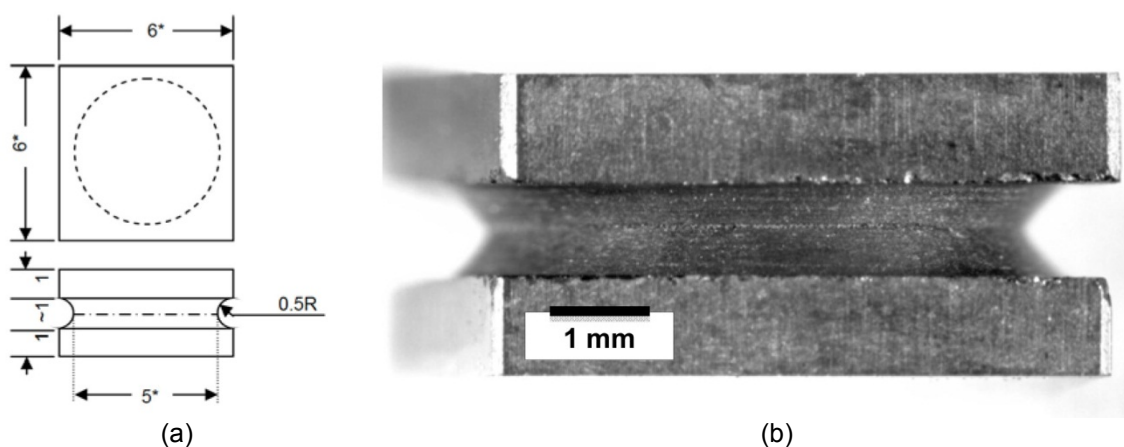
(a) Drawing of miniature torsion joining specimen for HFIR irradiation. Dimensions are shown in mm in (a). Shown in (b) is a photomicrograph of a PNNL fabricated torsion specimen. The joint line is visible along the specimen horizontal centerline.
